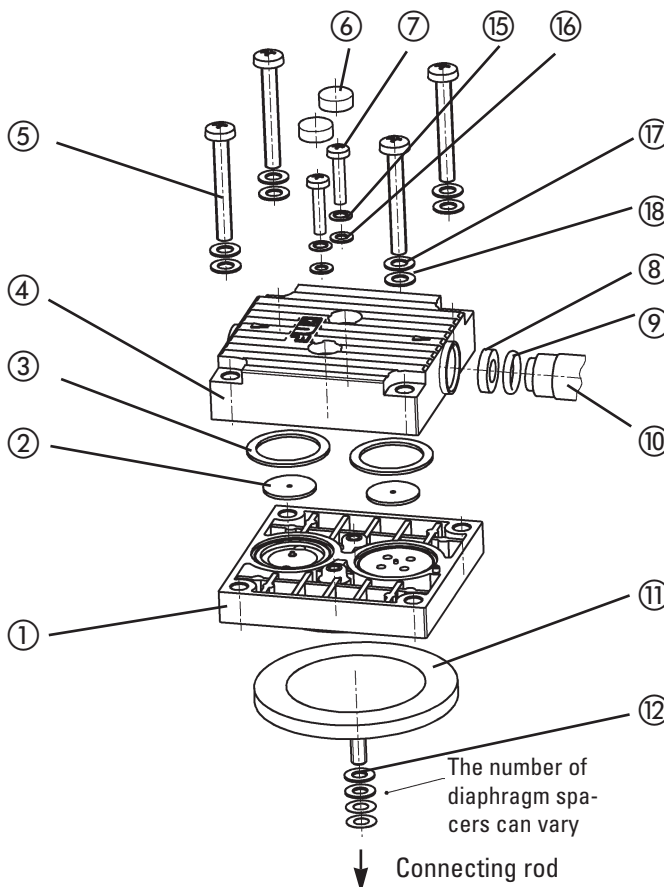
Pump head N 816.1.2 K_.18 (exploded drawing)
